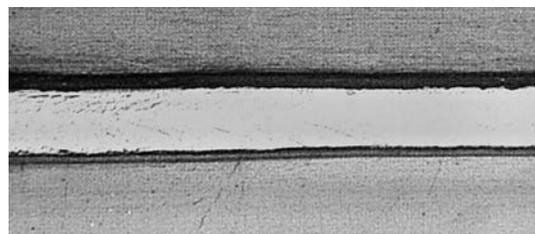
The glossy appearance of DW-308L fillet weld bead.
